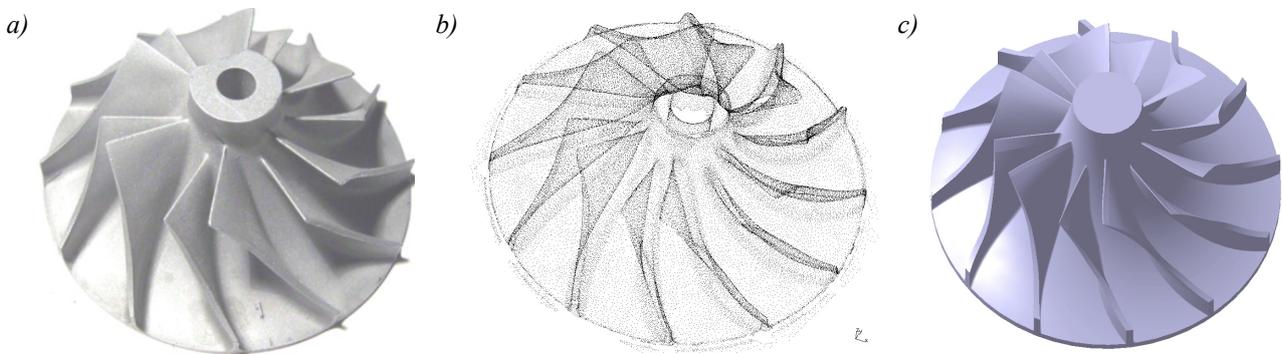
K24 compressor wheel geometry. a) real design, b) cloud of points, c) solid model
